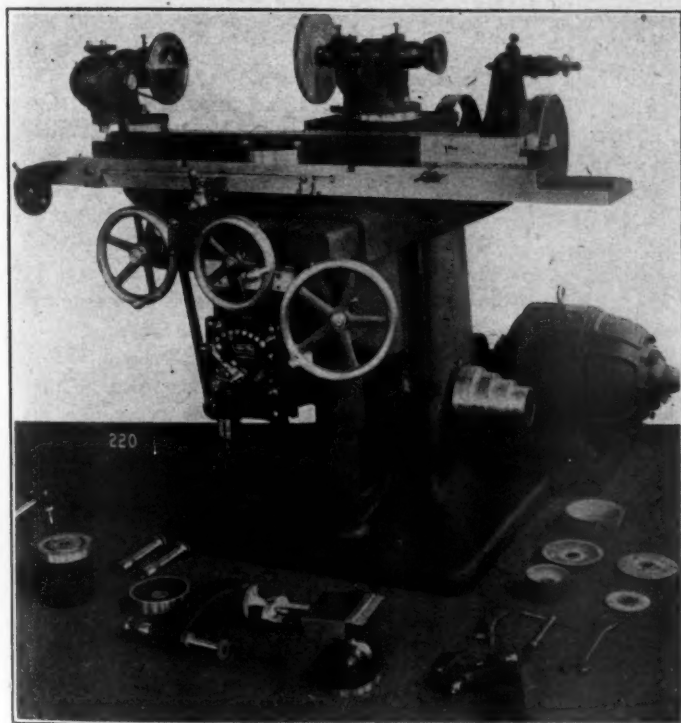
NO. 2 CINCINNATI UNIVERSAL CUTTER AND TOOL GRINDER.
